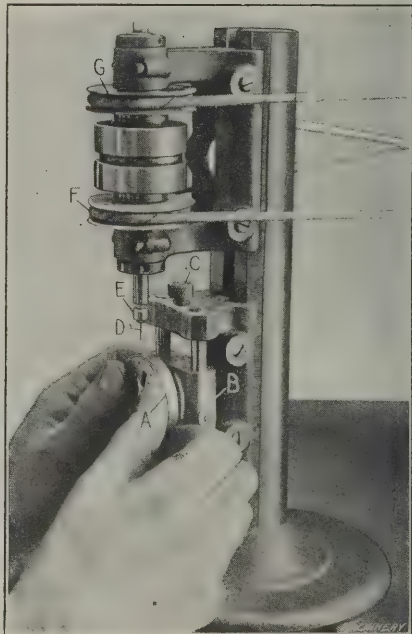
Friction Tapping Machine for Dial Foot Screw Holes
